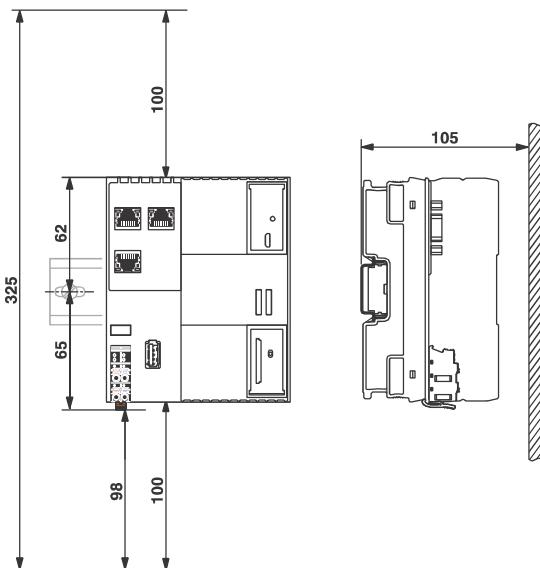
Mounting distances: AXC 305x, AXC F 2151 controller (dimensions rounded)
